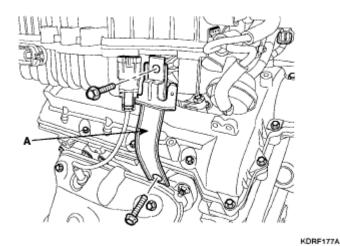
Identifying Surge Tank Bracket Courtesy of HYUNDAI MOTOR CO.
